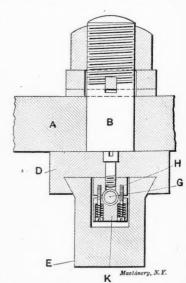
Section through Half-nut, Screw and Spindle Guiding Bracket.
